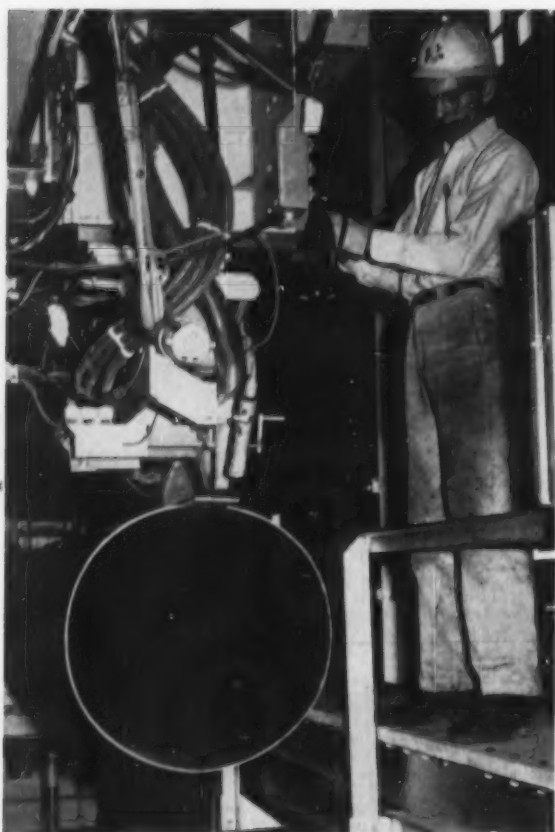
OD welding of submerged-arc-welded line pipe follows the ID welding at the Geneva Works, Provo, Utah. The following step is expansion in the usual manner.
